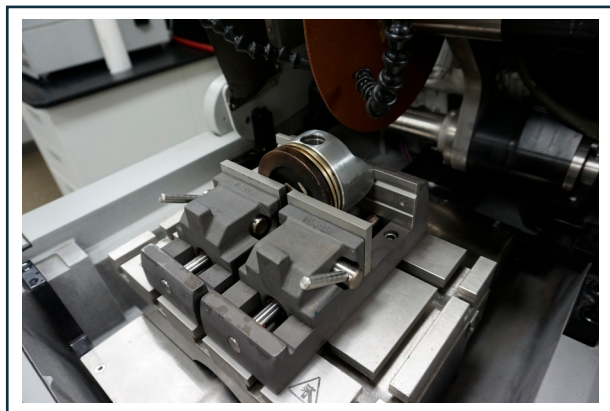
Aluminum Piston Fixture using Cam-Lock vises on LECO CX300.
